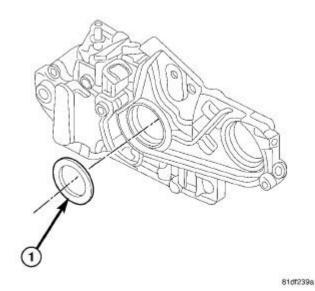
Front Crankshaft Oil Seal Courtesy of CHRYSLER LLC
